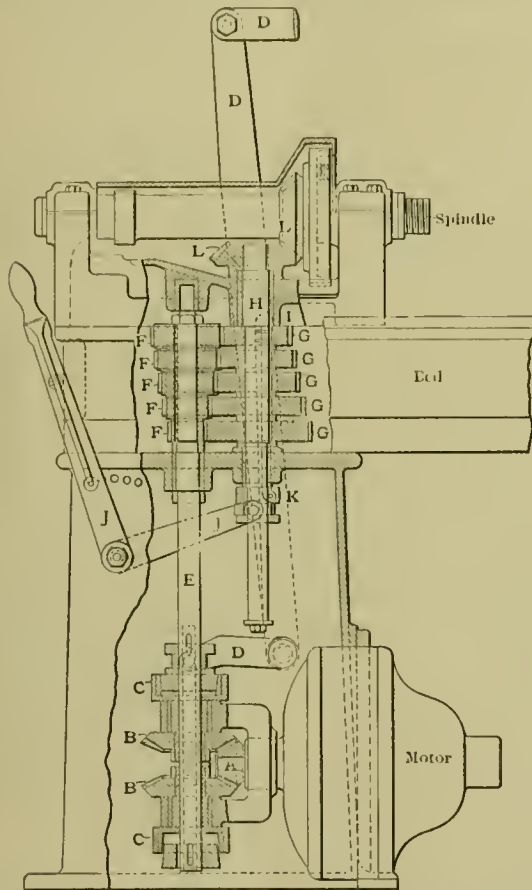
DETAILS OF THE VARIABLE-SPEED GEARING AND ARRANGEMENT OF MOTOR IN THE BOX LEG.—THE FLATHER LATHE.
